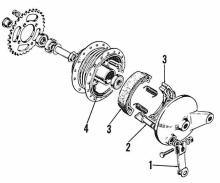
Exploded view of simple rear brake assembly. Front brake may be similar. Lever (1) is actuated by controls and turns cam (2) expanding shoes (3) against
